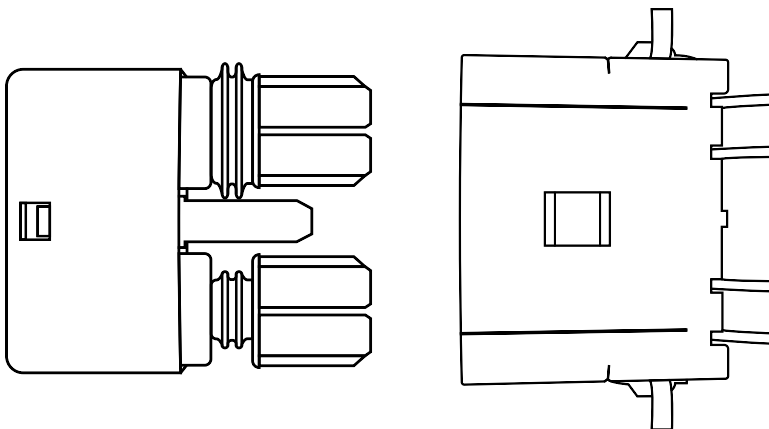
Cable plug connector (left), Fathom socket connector (right)
